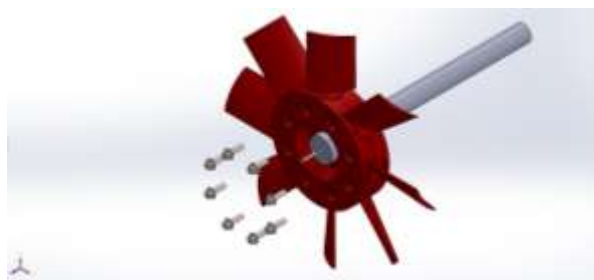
3D Model of Fan Assembly in the Wind Tunnel
